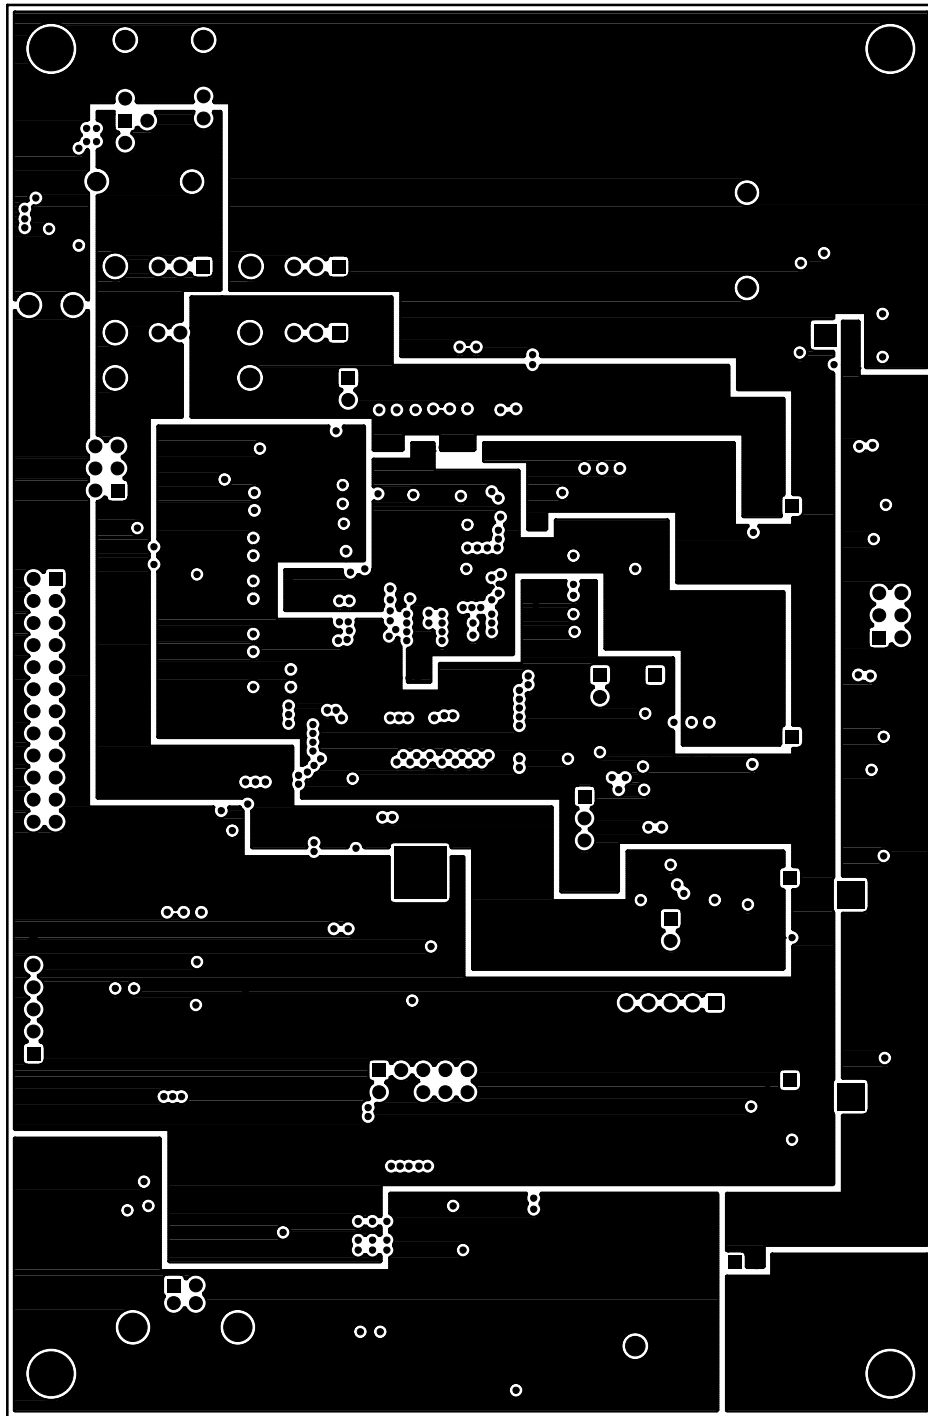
MAX44000 EV Kit PCB Layout—Layer 3
